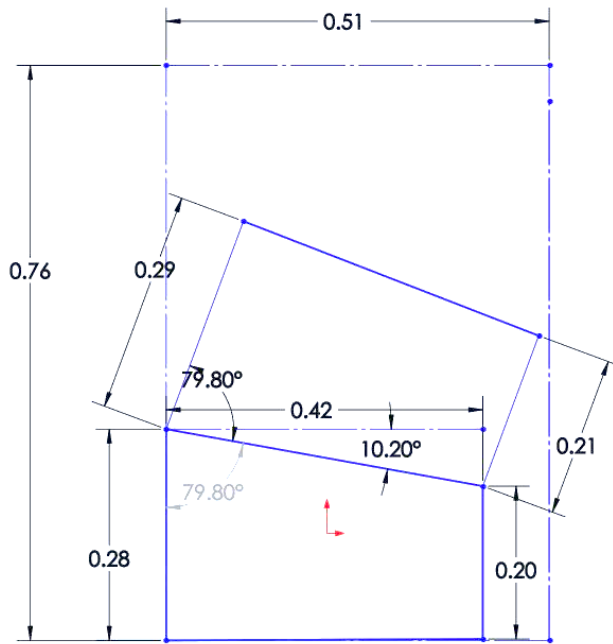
CAD sketch of inboard panel template, dimensions in meters
